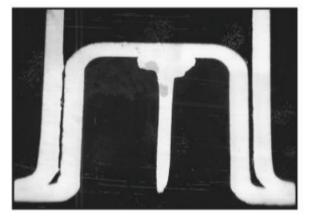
Photo D. The most reliable construction method used metallurgical "nail head" weld to the header.
